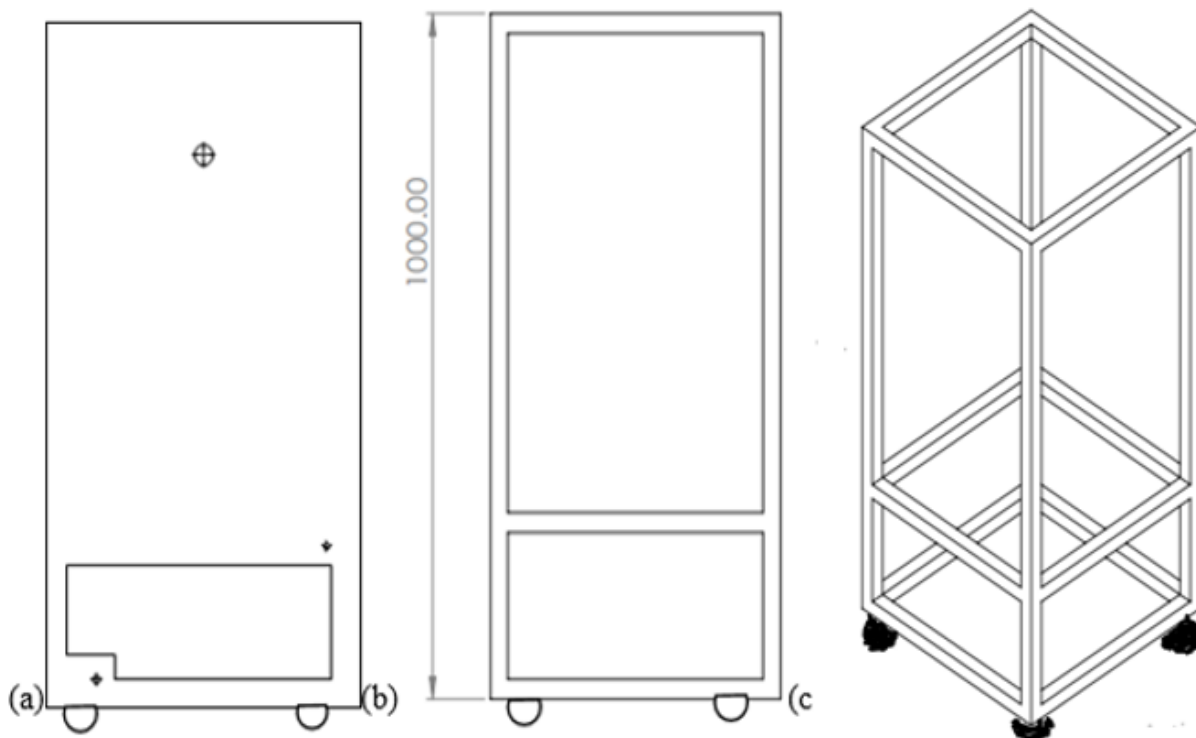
Cooler box (a) side view (b) front view (c) 3D of frame
